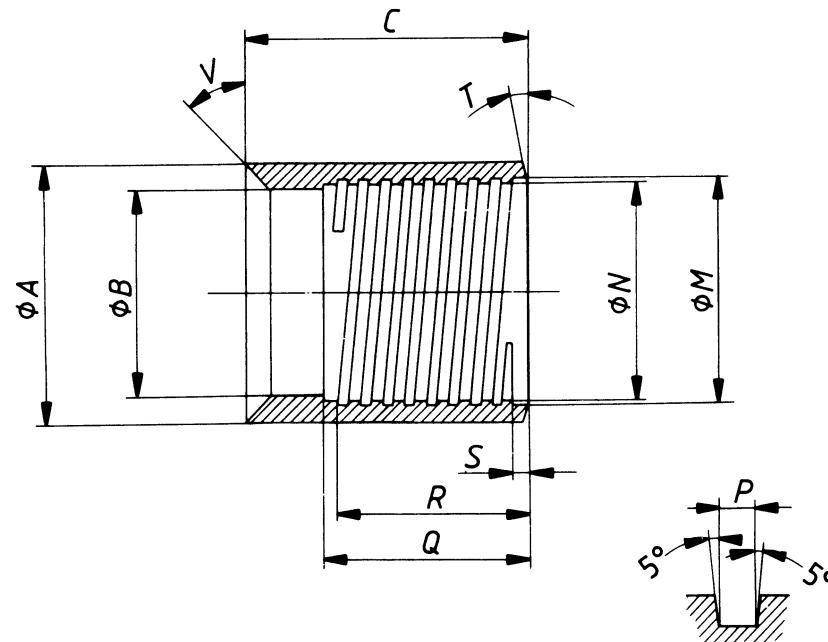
“W” design flush-jointed casing — Casing drive shoe (see Table 11)
